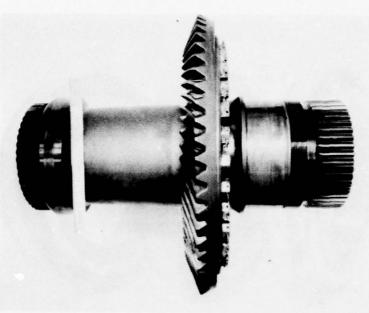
Main input gear and gearshaft after 25-minute loss-of-lube test of optimized transmission configuration number 1.
